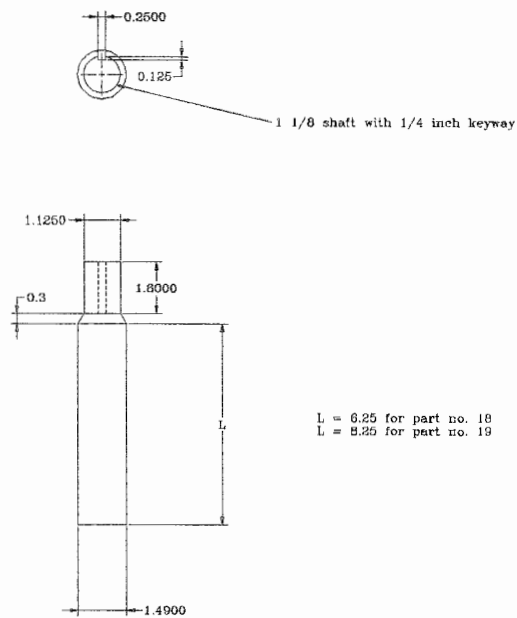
Part No. 18 & 19 LIDAR and RADAR Motor Shafts
